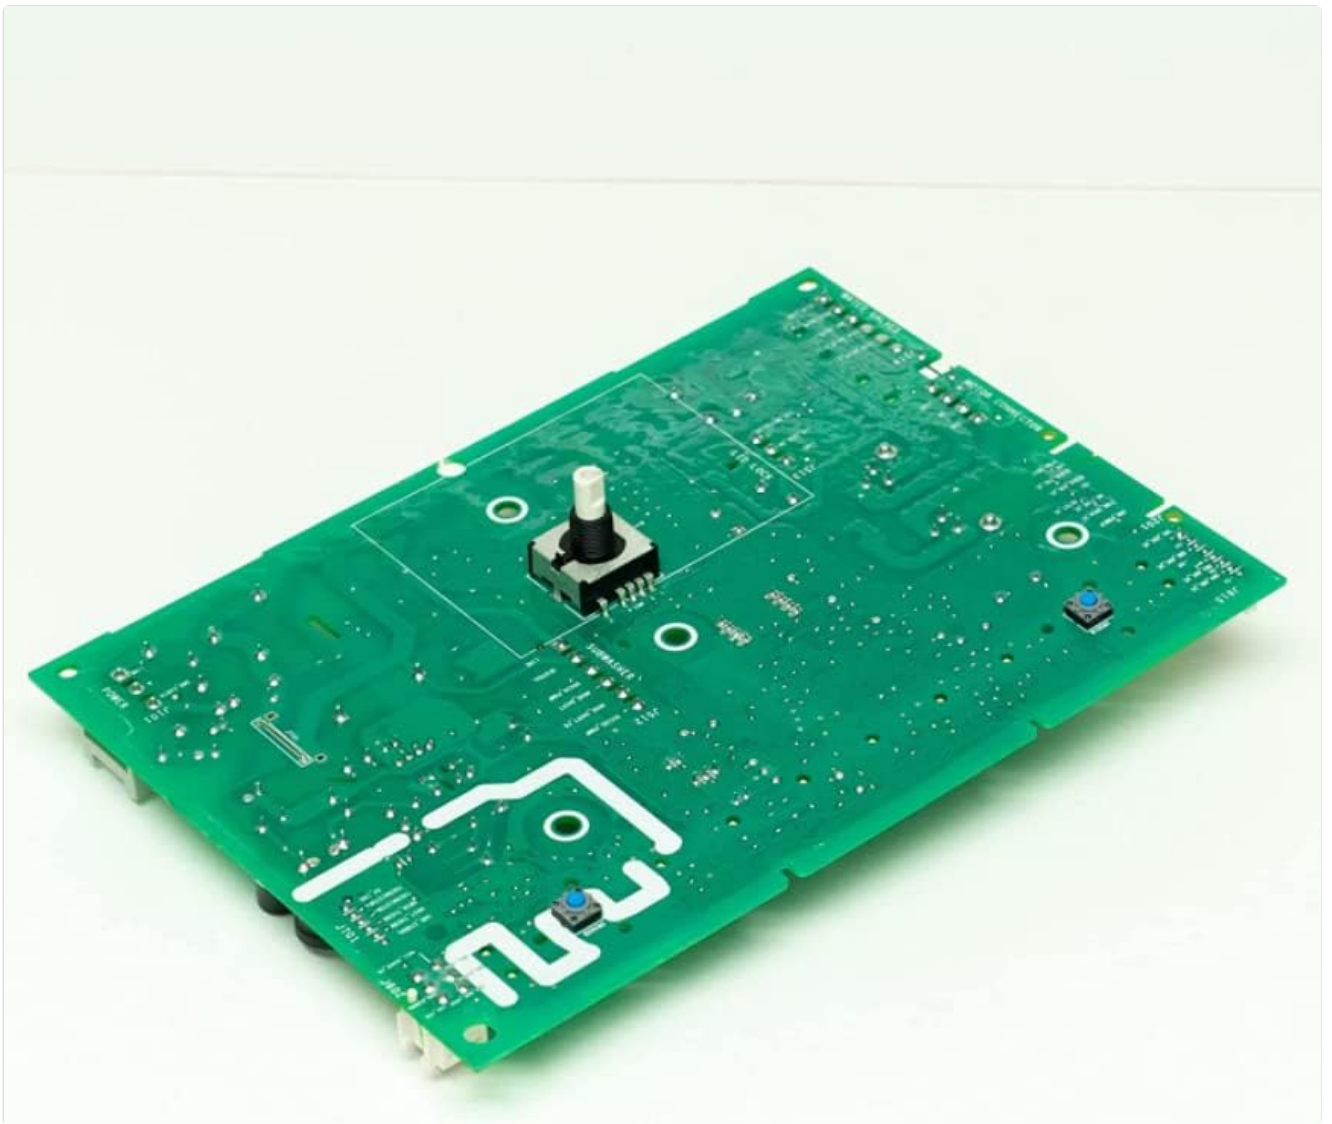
Bottom view of the Interface Control Board, illustrating the mounting points and the shaft for the rotary knob. Ensure proper alignment during installation.
